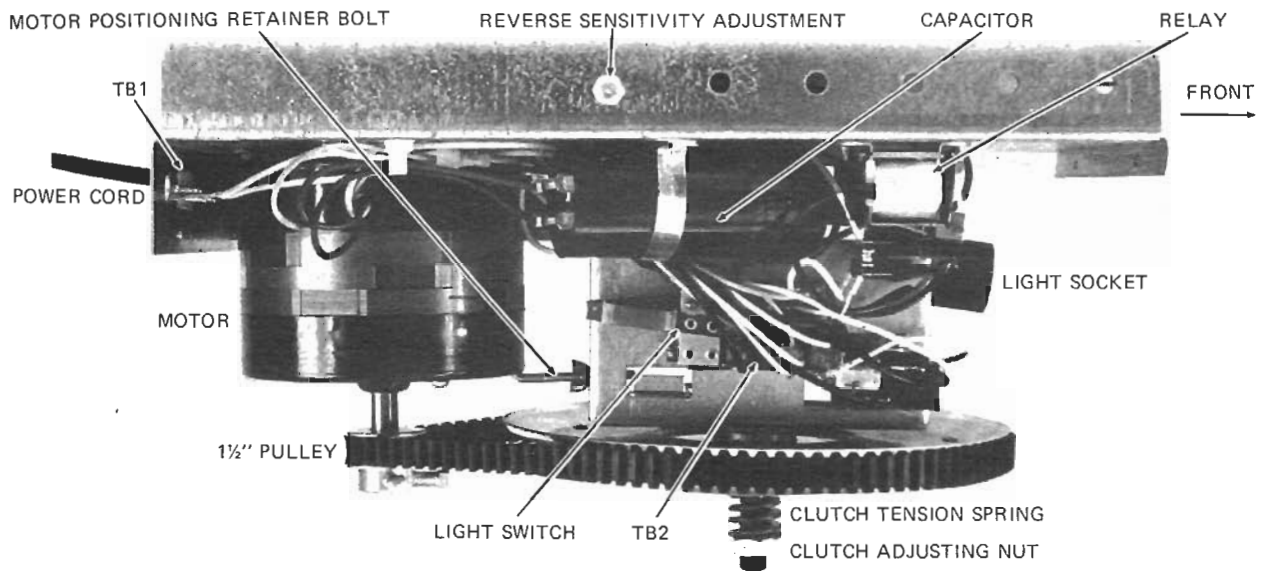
POWER UNIT-RIGHT SIDE VIEW (COVER REMOVED)
